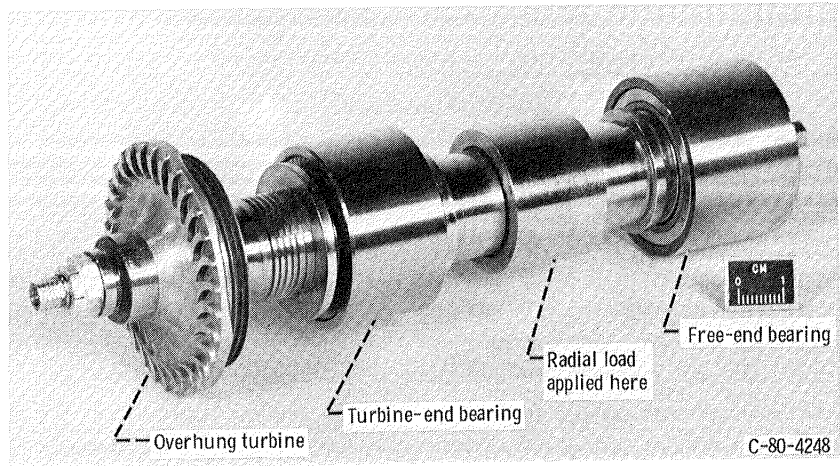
Hybrid-hydrostatic-bearing test assembly.
